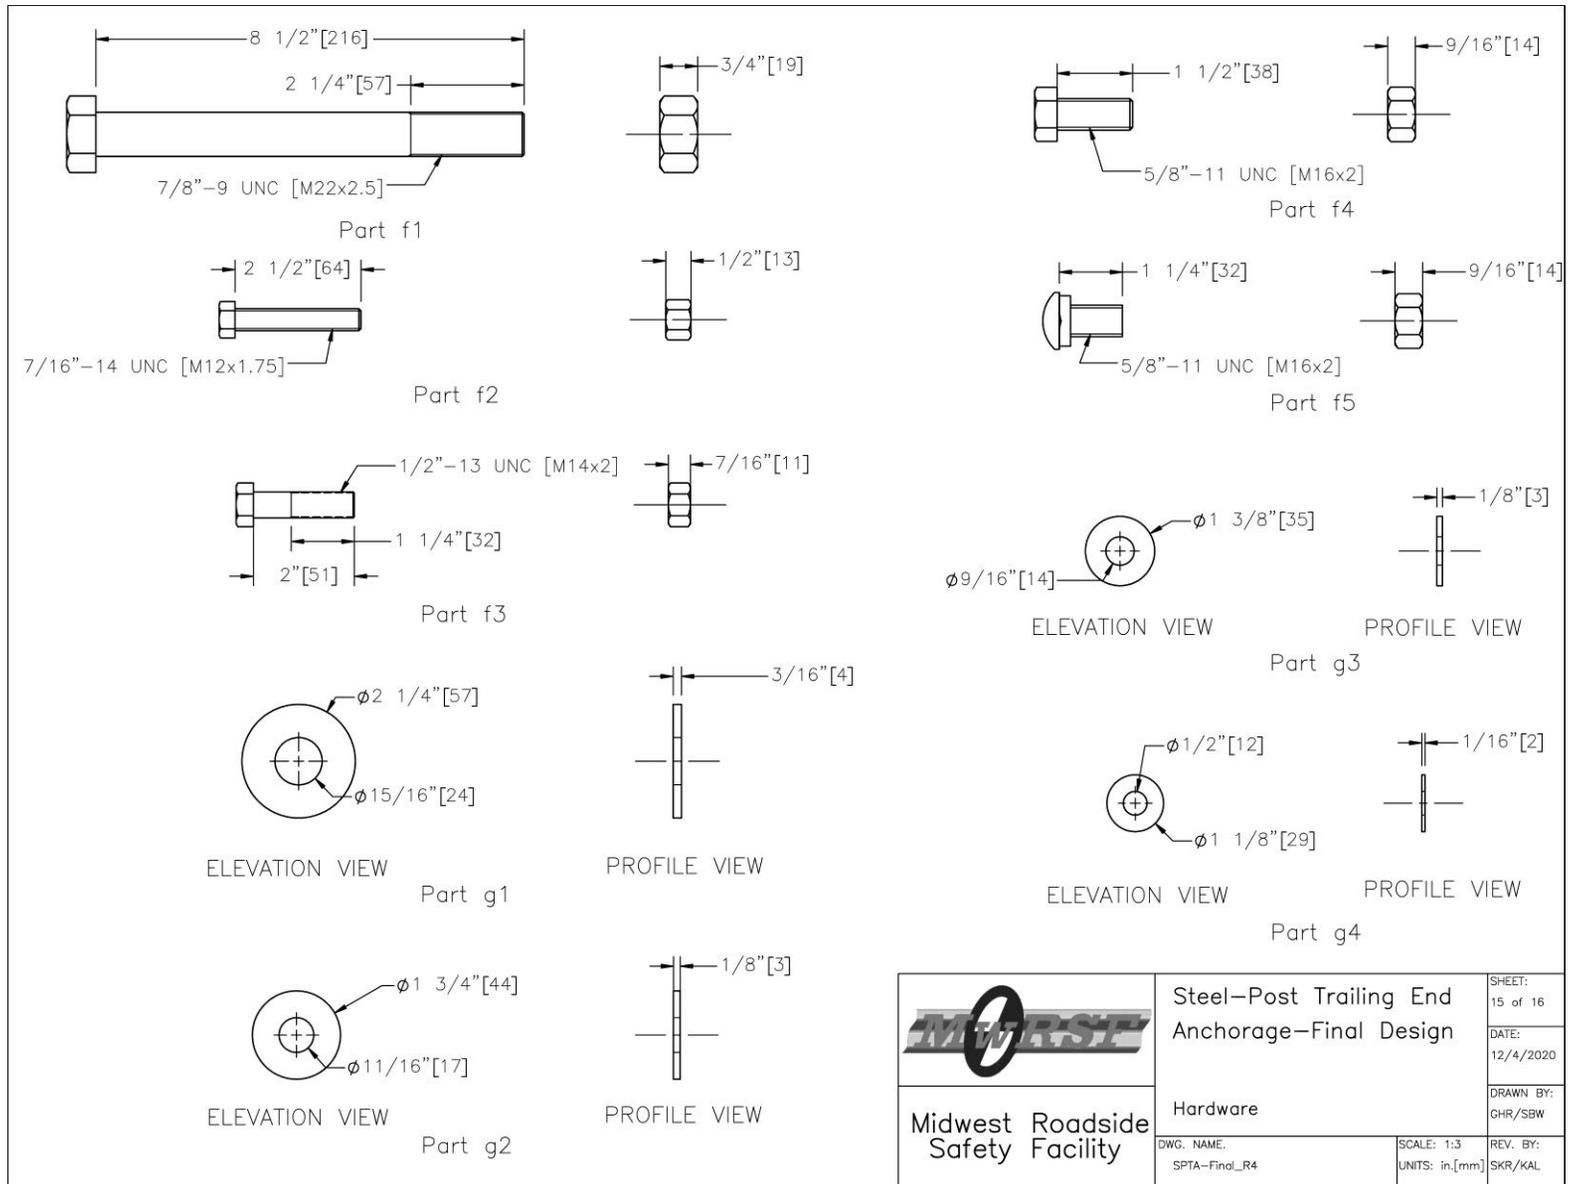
Steel-Post Trailing End Anchorage, Hardware
